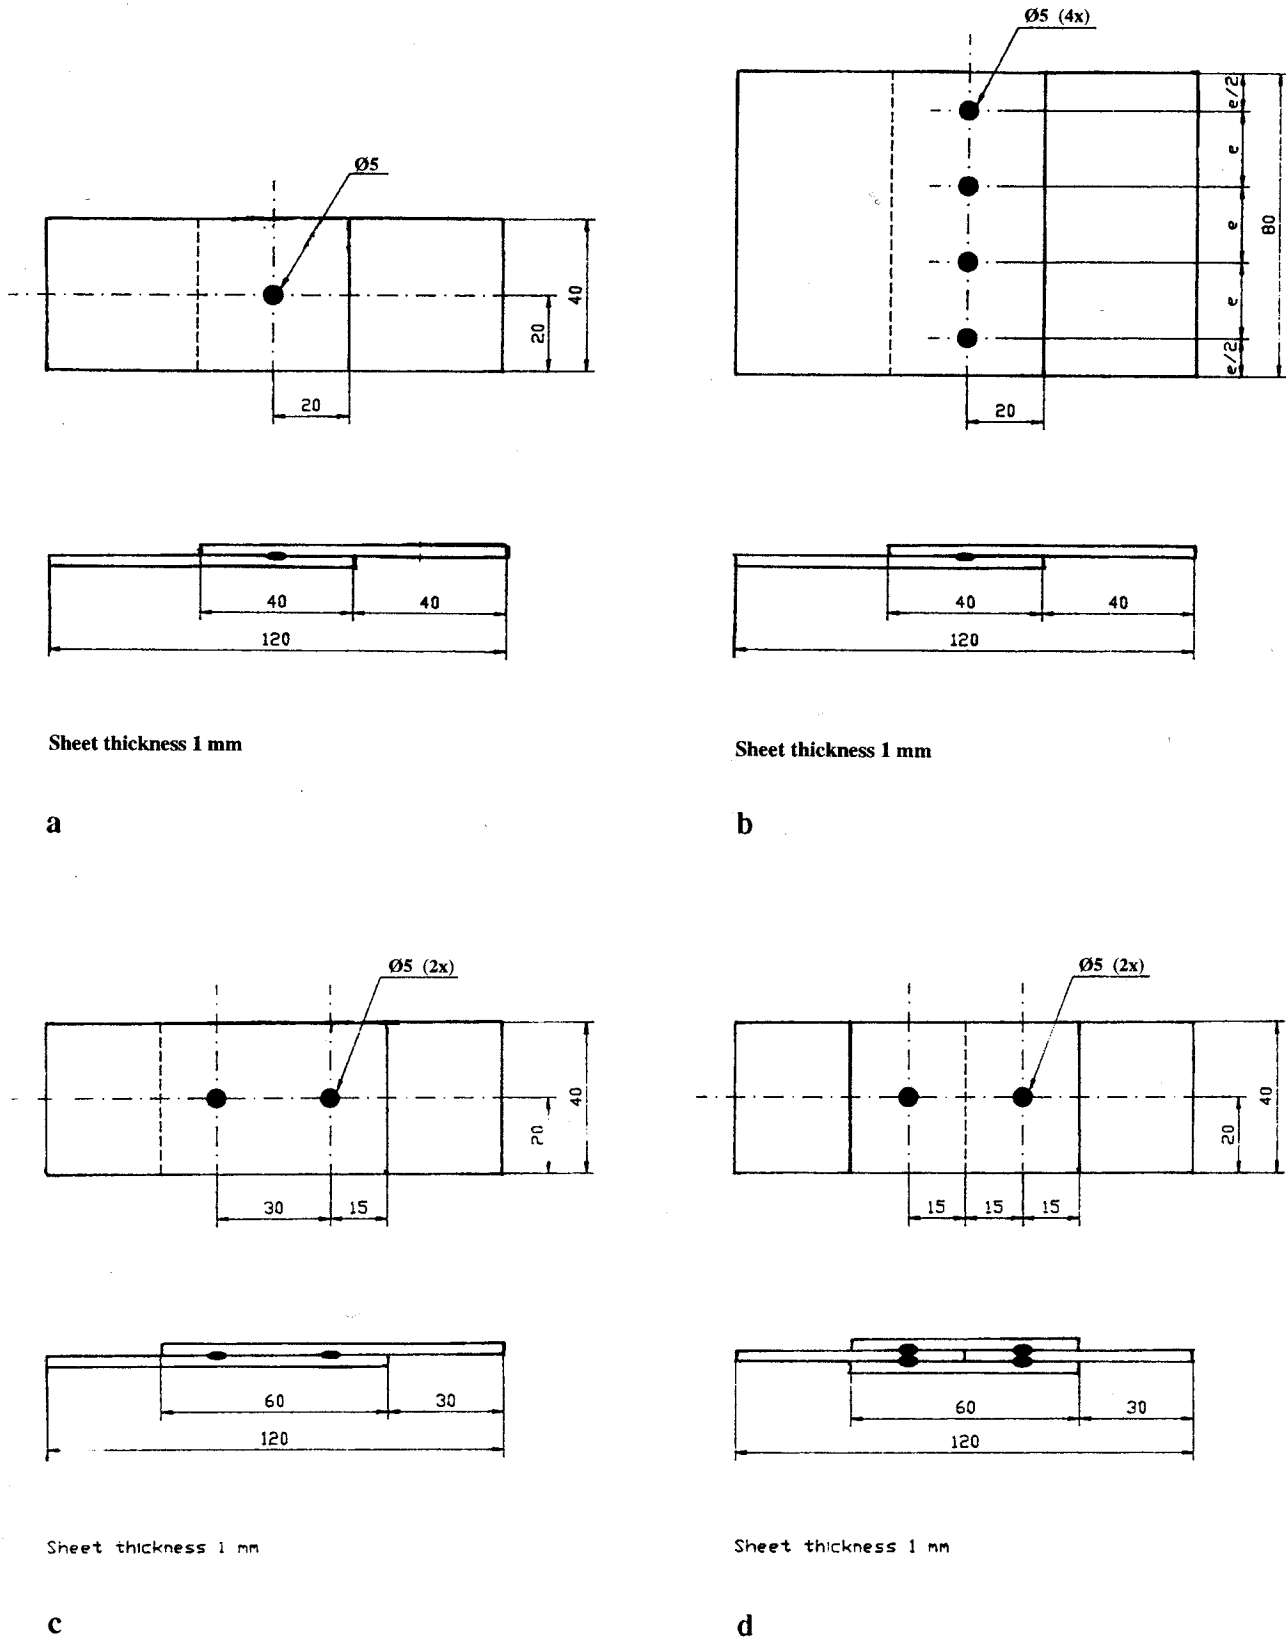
Small specimens used for additional tests: (a) STS = shear tensile single; (b) STM = shear tensile multiple; (c) STD = shear tensile double; (d) SST = symmetrical shear tension
